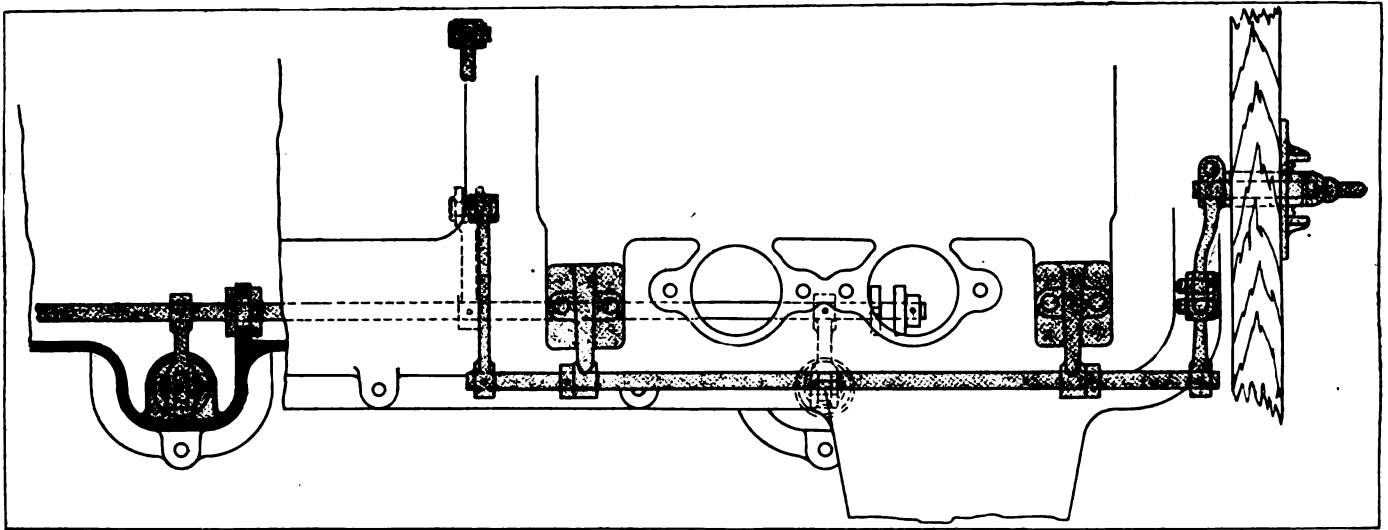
Plan view of the new oil level adjusting device fitted to the model 4-44 and 6-66 Pullman cars for 1913
